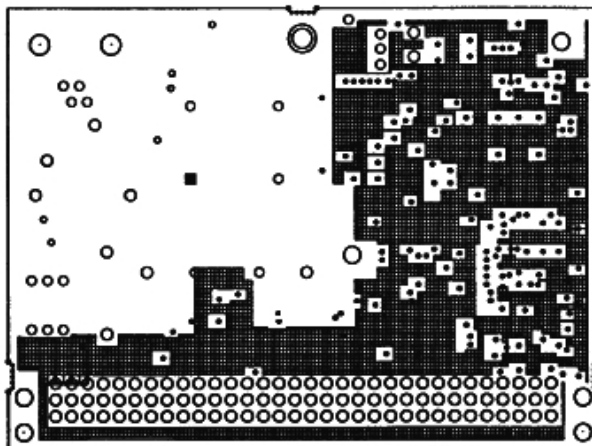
Fig B-a Modem Module (MMM) 2 MRAM Printed Circuit Board Assembly Ref: 26025-003-50
